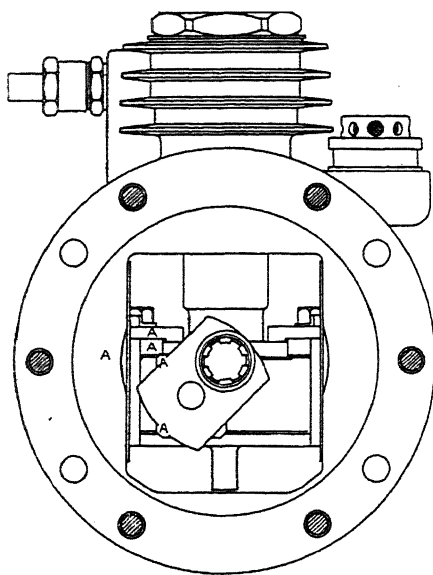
IDENTIFICATION MARKINGS TO AID IN REASSEMBLY OF TYPE AV COMPRESSOR
